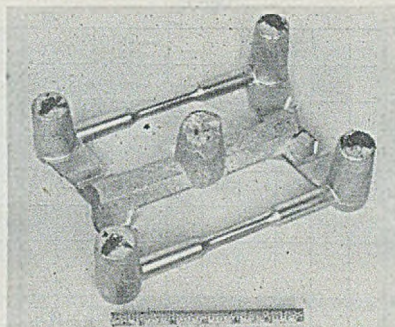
Shell-moulded Aluminium-alloy Test-bar (43 Alloy), As-cast.
